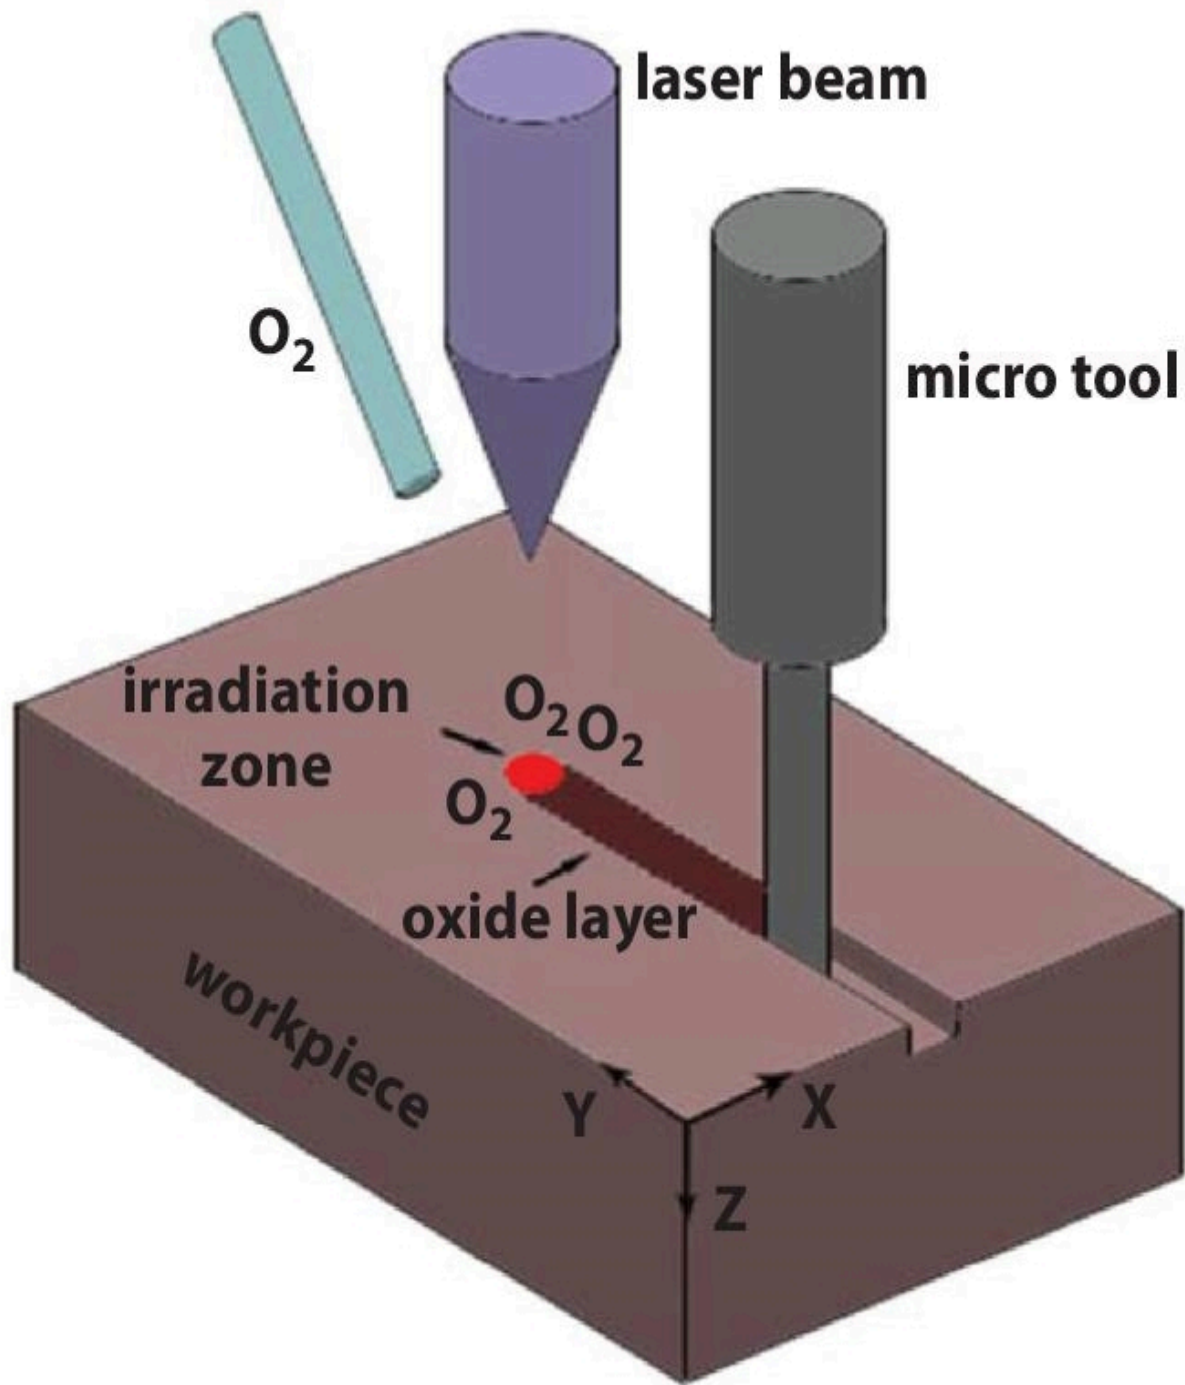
Schematic representing material removal mechanism of micromilling hybrid process.
